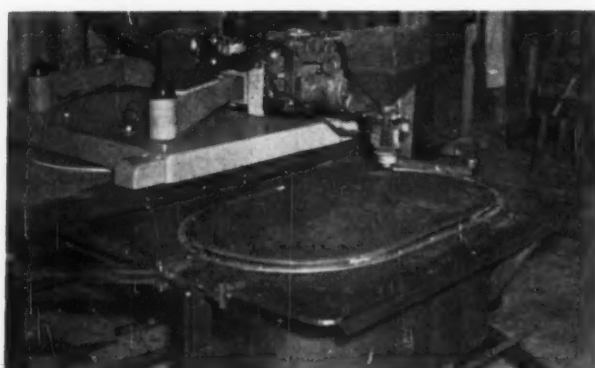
SHAPE-WELDING FUEL-OIL TANKS WITH A STANDARD TEMPLATE-GUIDED MACHINE
